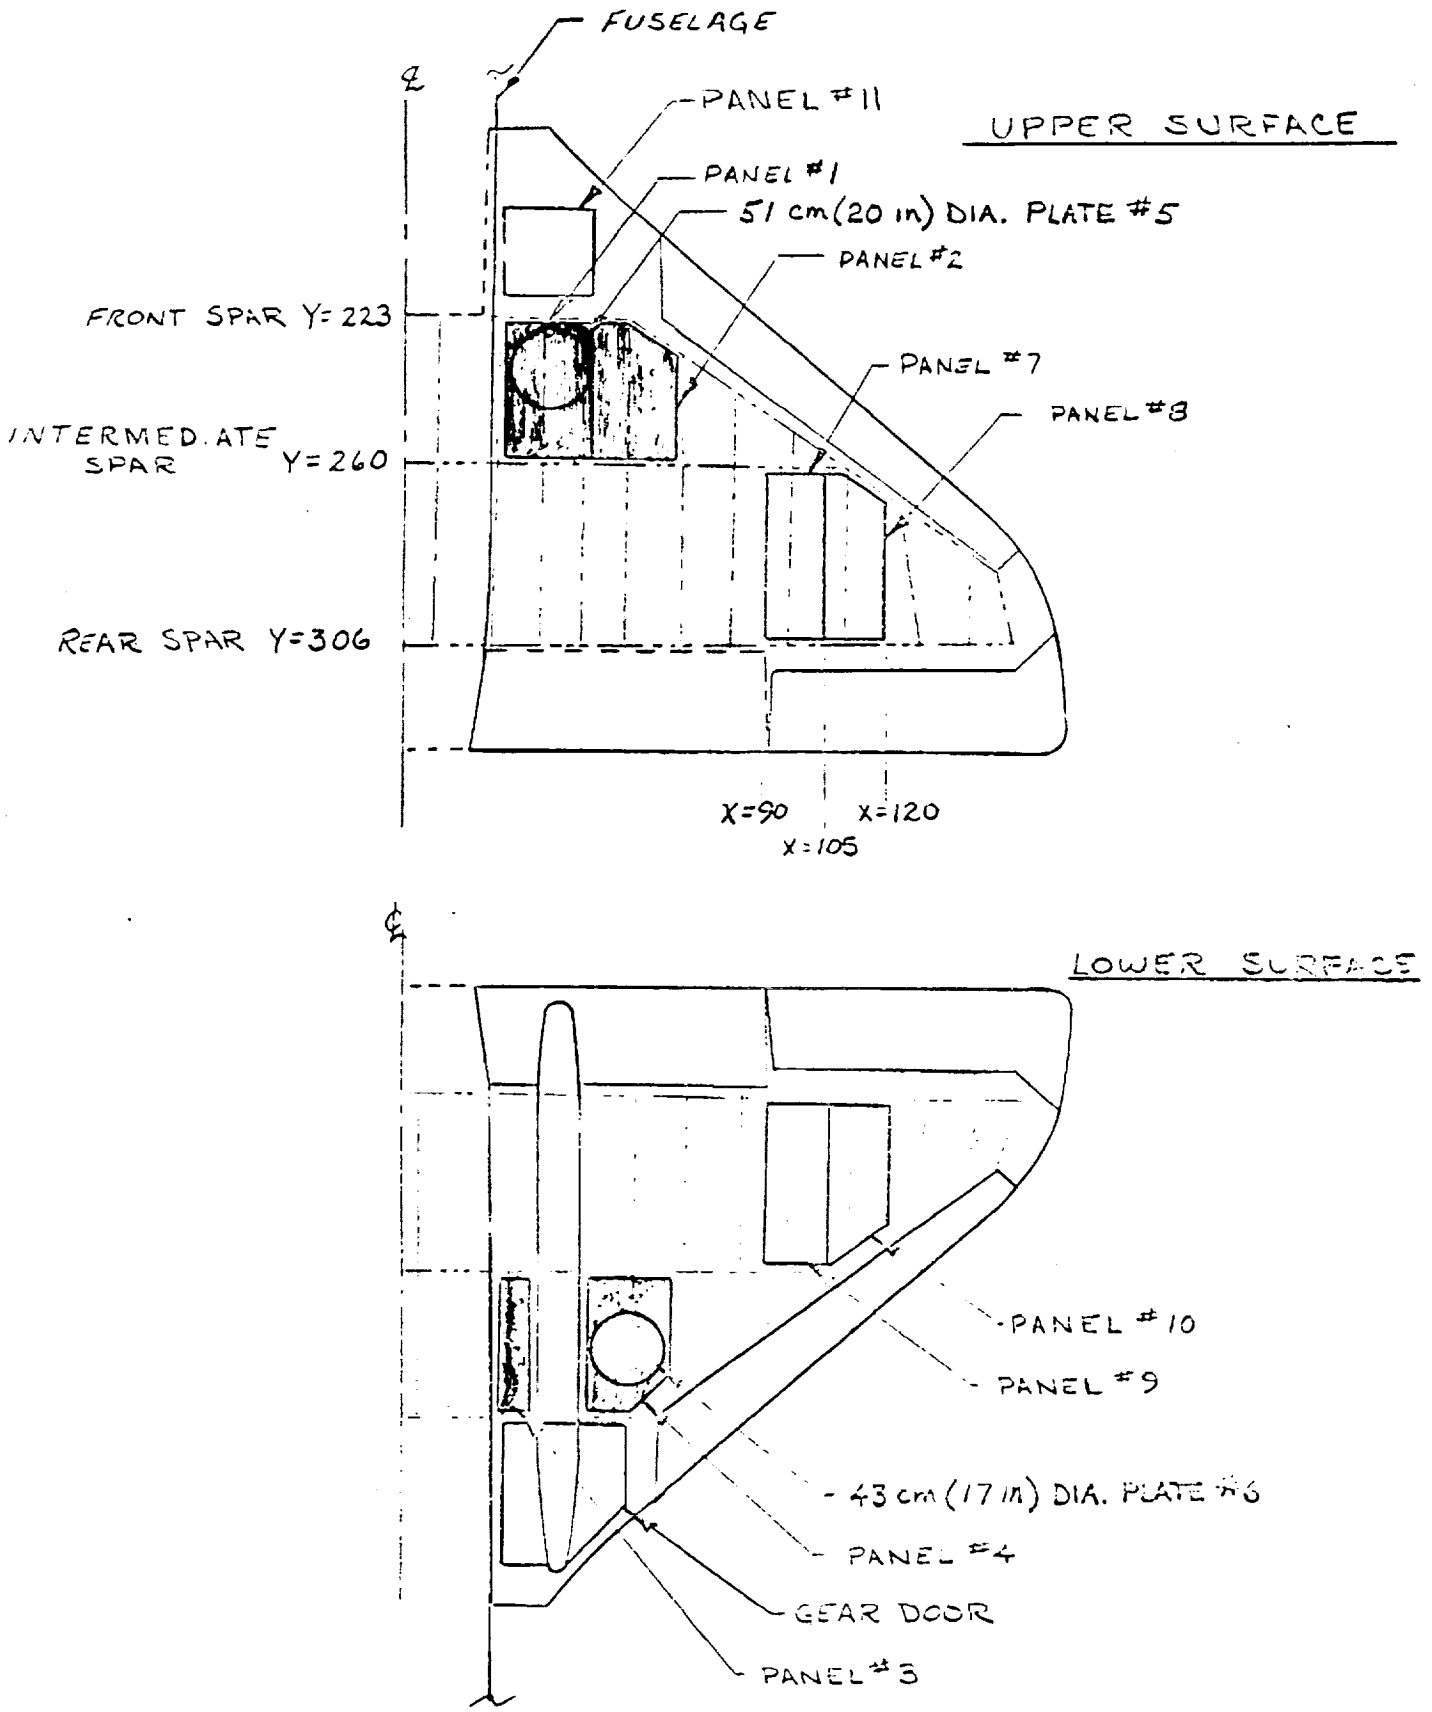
HOLE CONFIGURATION #3. PANELS 1,2,3,&4 AND PLATES 5&6 REMOVED
